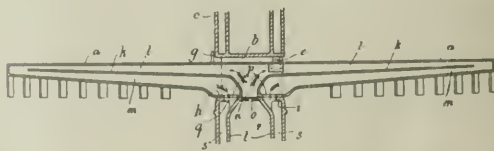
AIR-COOLED RABBLE ARM FOR ROASTING FURNACES
